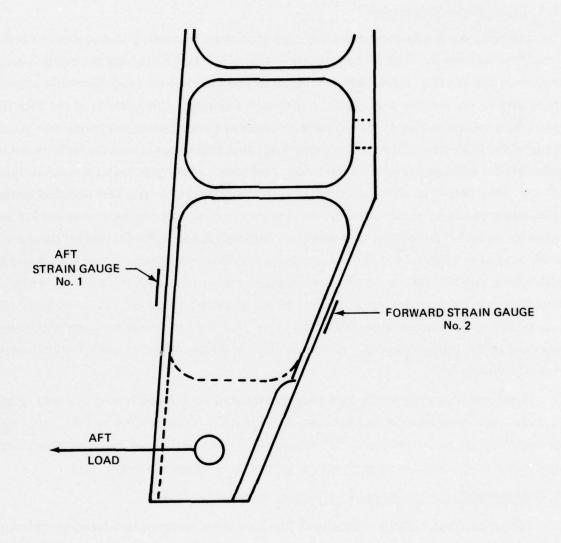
Load-to-Failure Fatigue Testing Fixture
